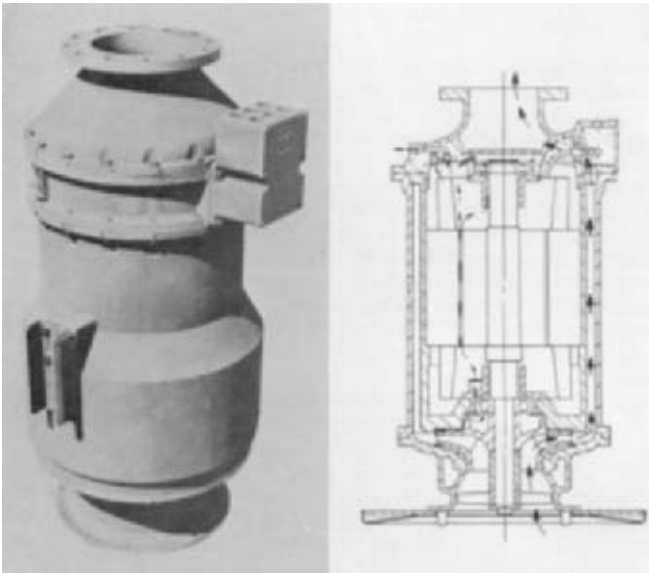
On-board cryogenic cargo pumps—photograph on left and cross-section on right showing flow through the motor (J.C. Carter Company, Inc.)
